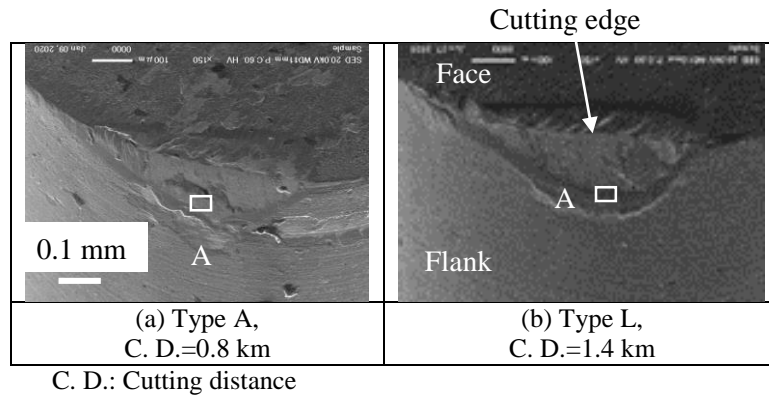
Tool Wear at a Cutting Speed of 3.33 m/s, Feed Rate of 0.1 mm/rev and Cutting Depth of 0.1 mm
